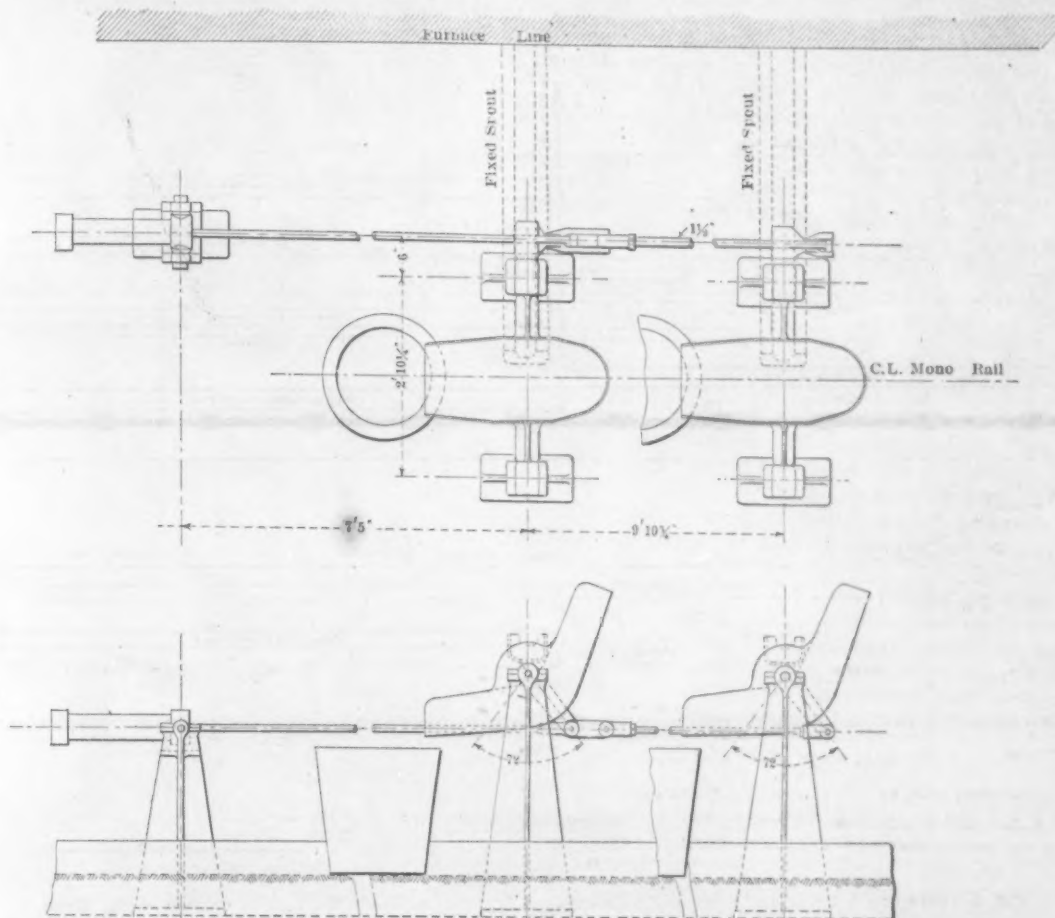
Tilting Spout for Reverberatory and Open Hearth Furnaces, Facilitating Rapid Handling of Molten Metal.
